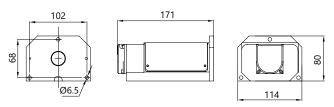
Outline drawing and dimensions of 3 mm fiber bundle
